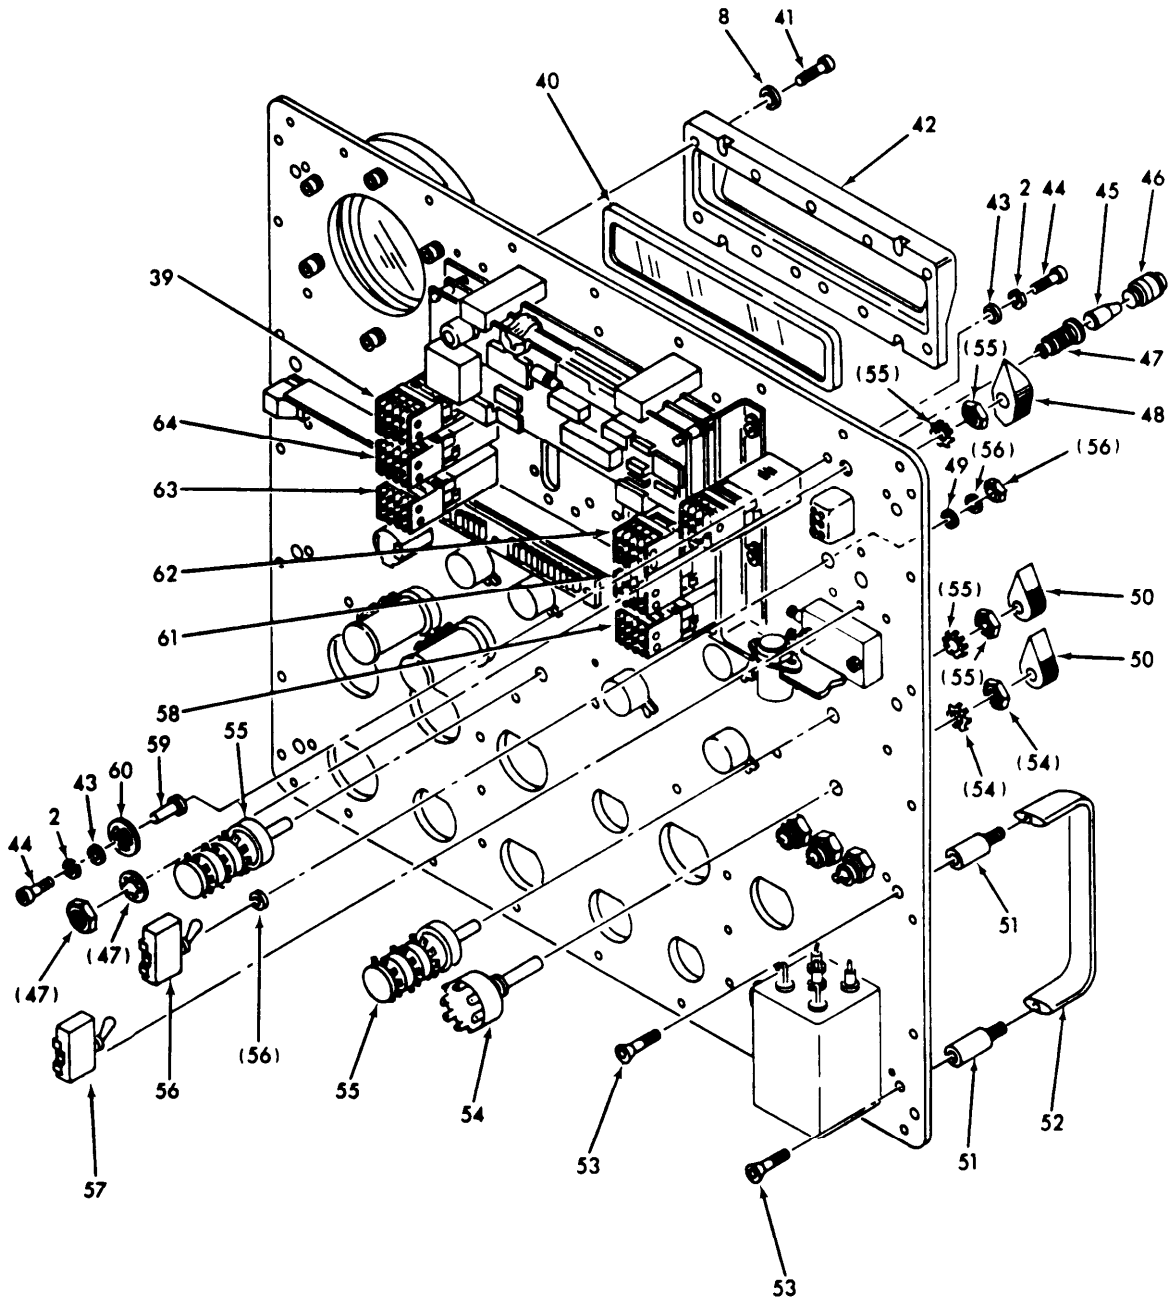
PANEL ASSEMBLY A1 COMPONENT PARTS
